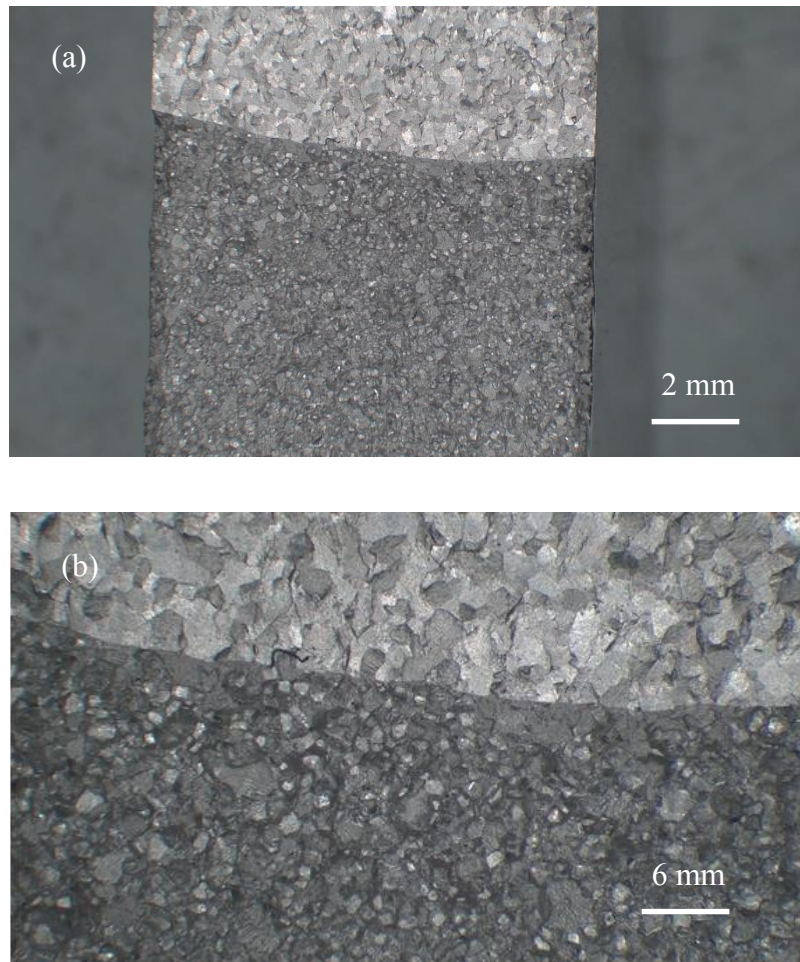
Fracture surface observed under OM from SQA1 specimen, (a) low magnification, (b) high magnification.
